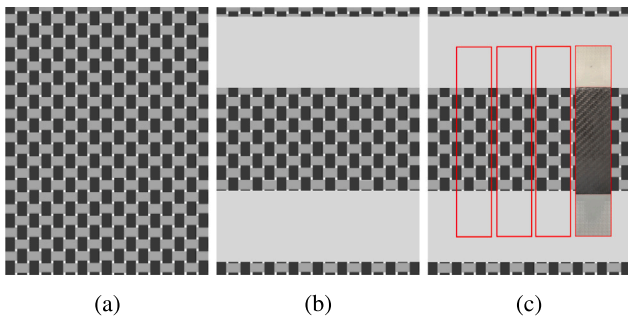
Manufacturing process of the Woven EPP specimens (a) Characteristic EPP panel (b) Schematic detailing the bonded end-tabs (c) Outline of specimen locations and manufactured specimen example.
